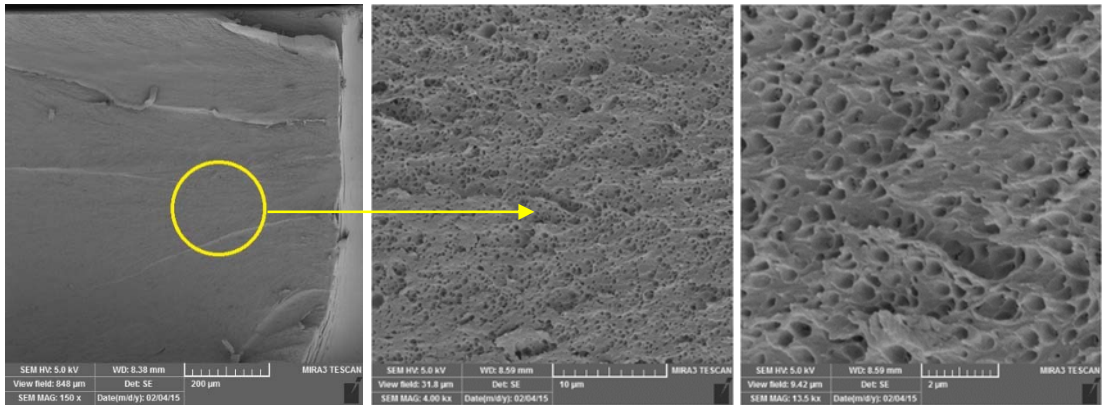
SEM micrographs of fracture surface of a specimen with a sharp crack with different magnifications (specimen sharpened using a laser cutting, crack radius = $R65 \mu\text{m}$). Laser cutting method exhibited the critical stress intensity factor lower than that for metal slitting saw method and greater than scoring method.
